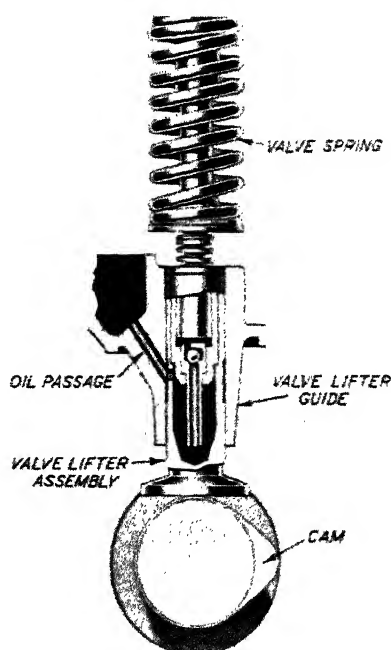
Lincoln Hydraulic Valve Lifter Assembly
